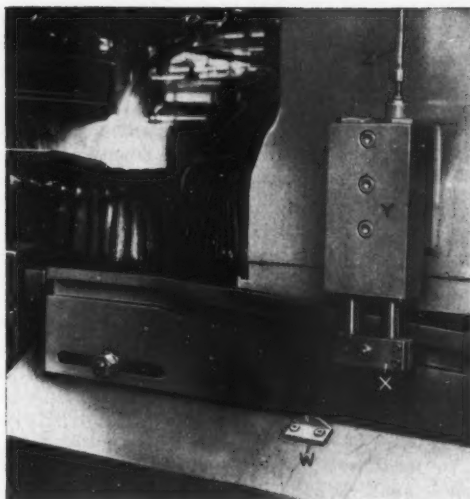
The cam on the machine bed, and the follower on the cutter head ram of the specially built Cincinnati Hydrotel milling machine, which control the speed of rotation of the work-table, to maintain a constant feed rate, regardless of the radius at which cutting is being performed
